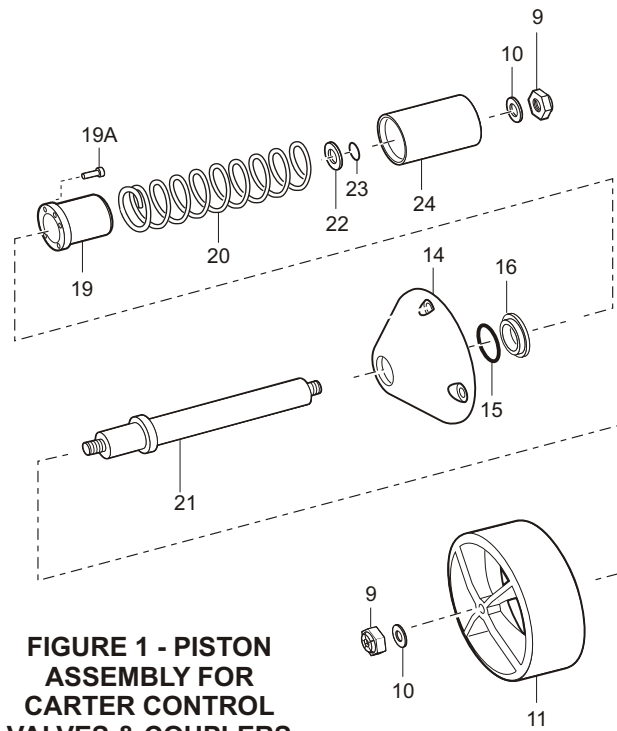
PISTON ASSEMBLY FOR CARTER CONTROL VALVES & COUPLERS
